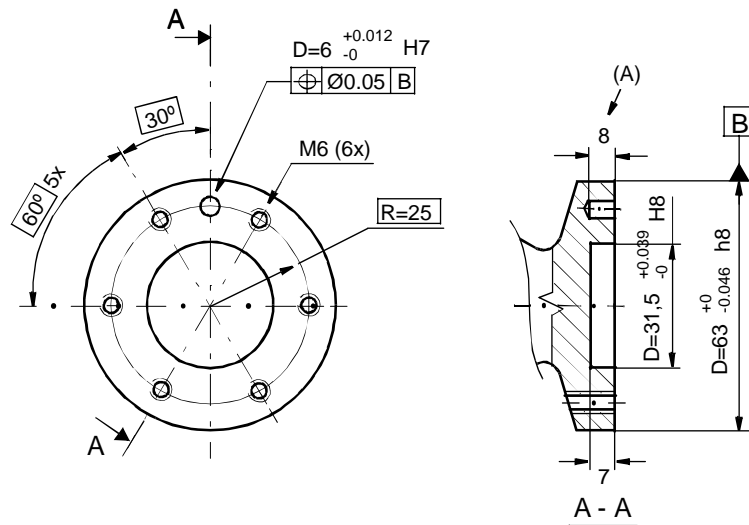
The mechanical interface, mounting flange (dimensions in mm).
